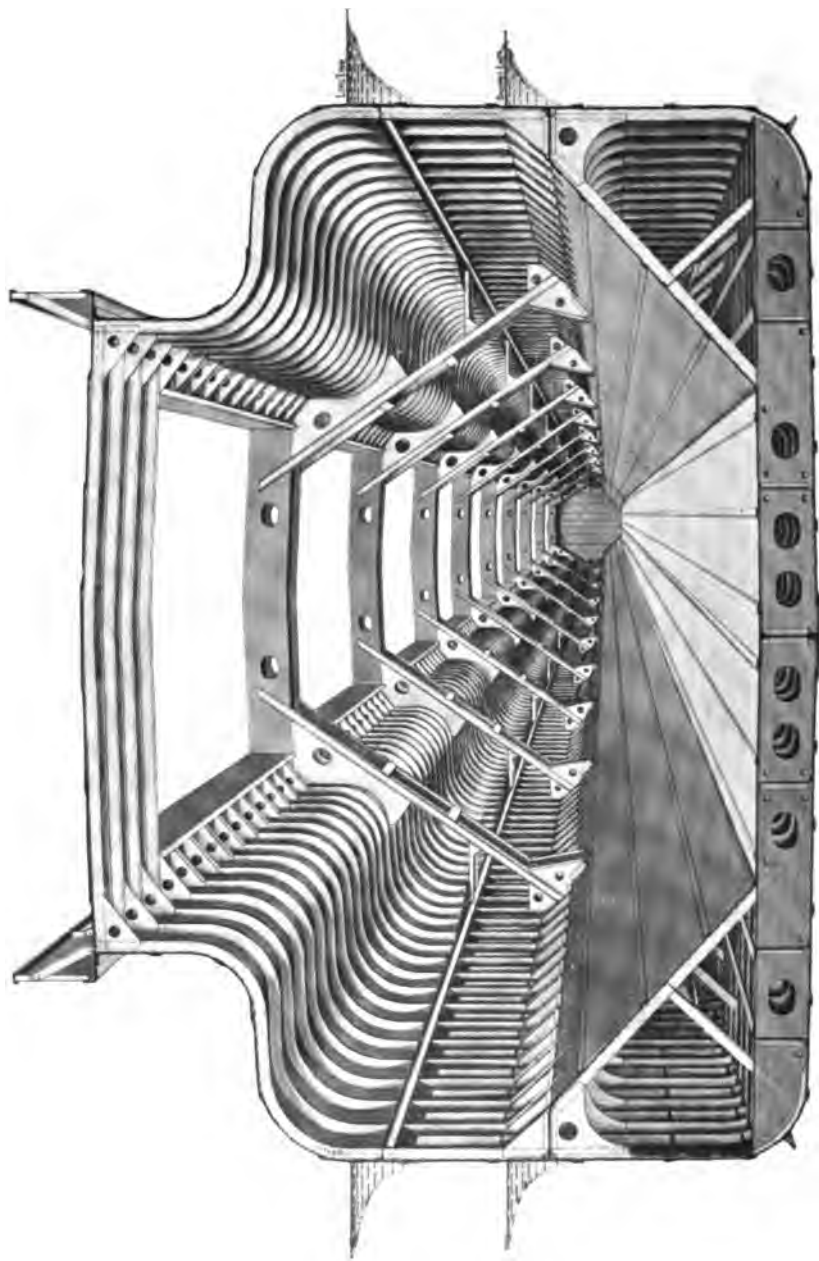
Hold View of special Self-trimming Type of Turret Steamer for Coal, Ore, and Timber Trades. Engines aft; no bulkheads between collision and boiler-room bulkheads; long hatch; large water-ballast capacity. Dimensions, 360 ft. 0 in. B.P. x 51 ft. 0 in. moulded x 26 ft. 6 in. depth moulded (harbour deck.)
